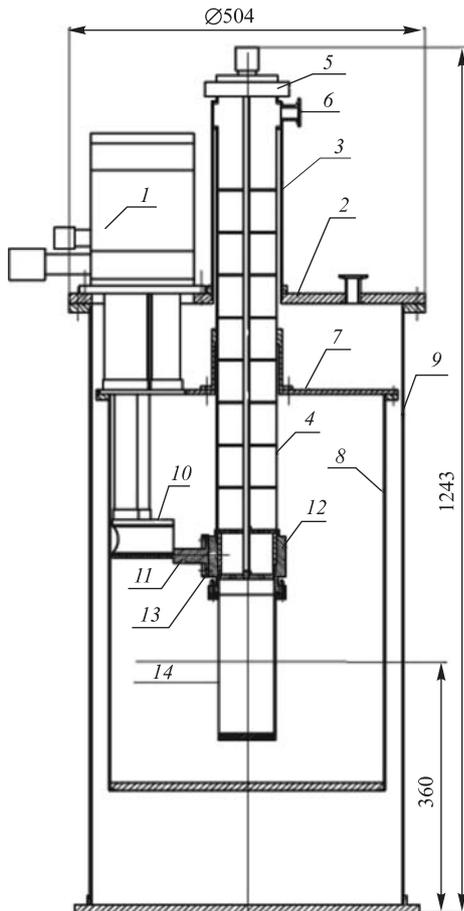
Shaft cryostat based on closed loop pulse tube refrigerator PT405 for the temperature range of 300–6 K. 1 — cold head PT405; 2 — flange of cryostat; 3 — head of cryostat; 4 — shaft; 5 — insert; 6 — flange NW25; 7 — flange cooled by first step of cold head; 8 — thermal shield; 9 — vessel of cryostat; 10 — second step of cold head; 11 — flexible thermal bridge; 12 — heat exchanger of insert; 13 — heater; 14 — sample chamber
